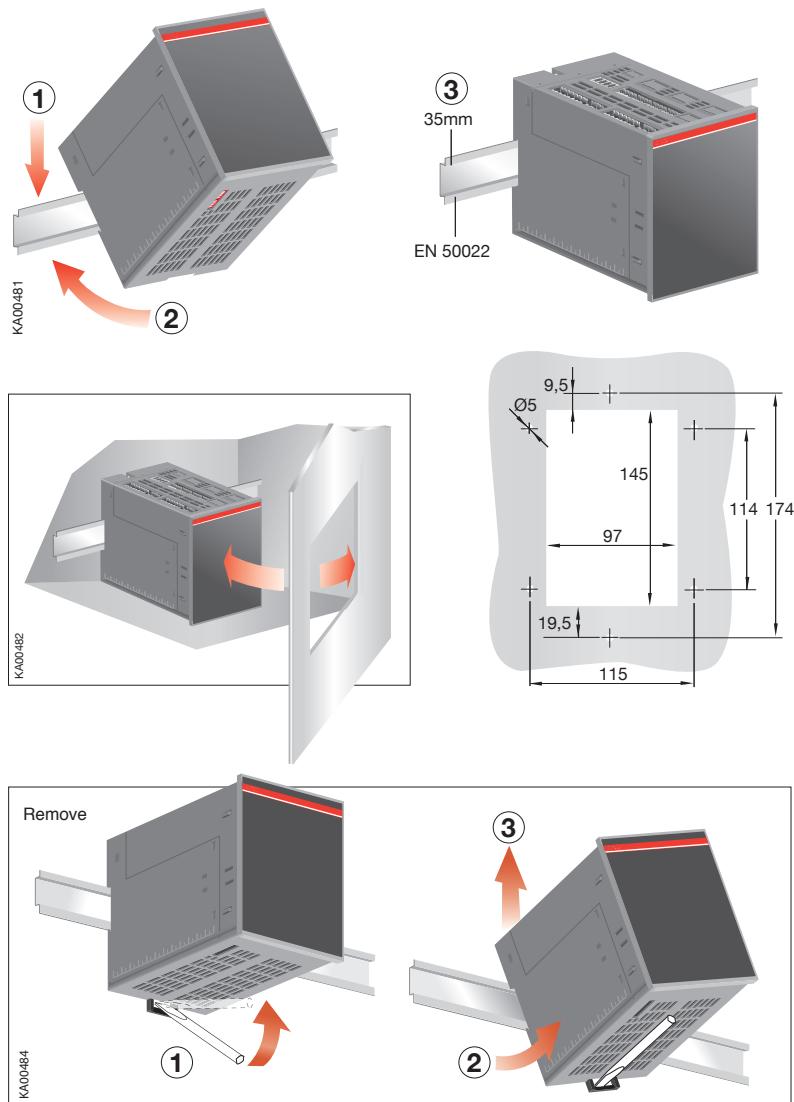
Automatic transfer switch ATS021, DIN-rail mounting
